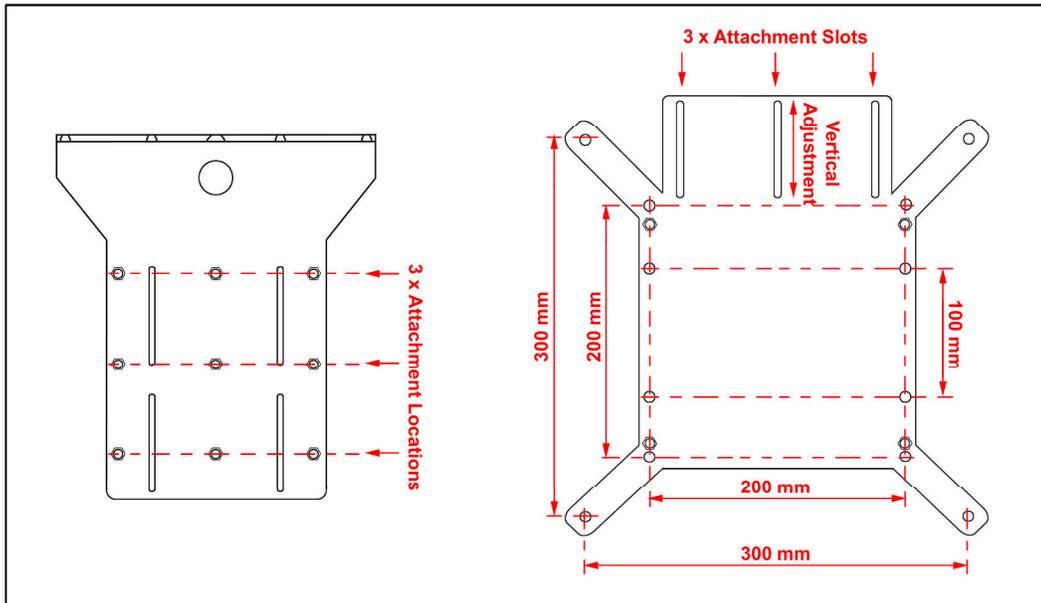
MedView Mounting Bracket and Adaptor Plate Layouts
